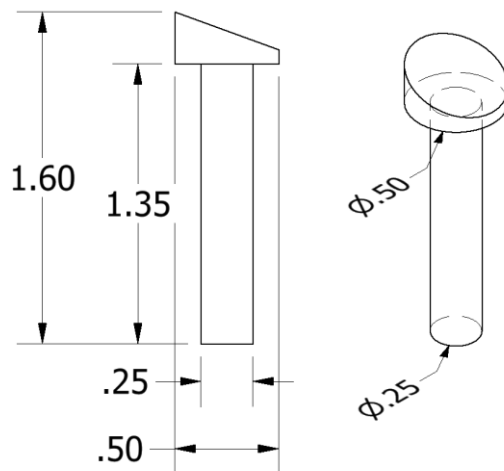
Sting attachment for Stardust testing. Dimensions in inches.
